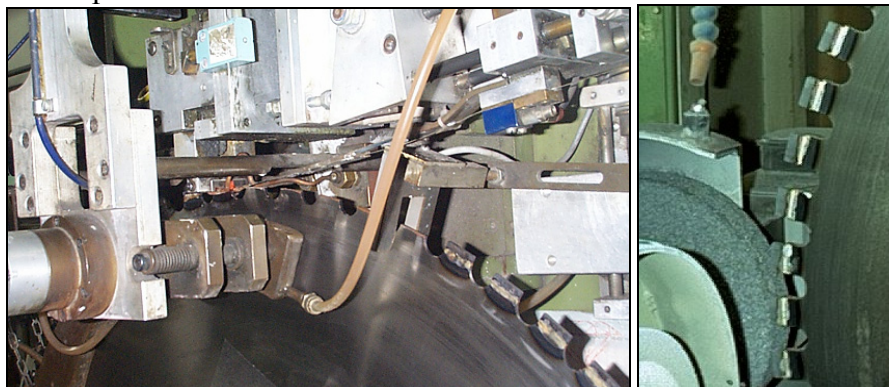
Left: Automatic segments brazing - Right: grinding the tipped disc
